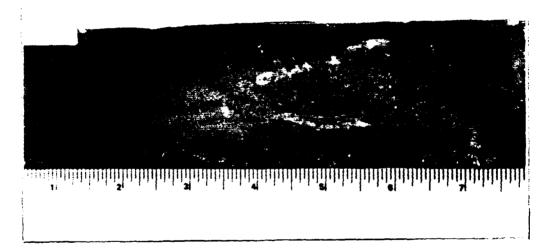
155-mm XM284 Tube SN3 fracture surface.
